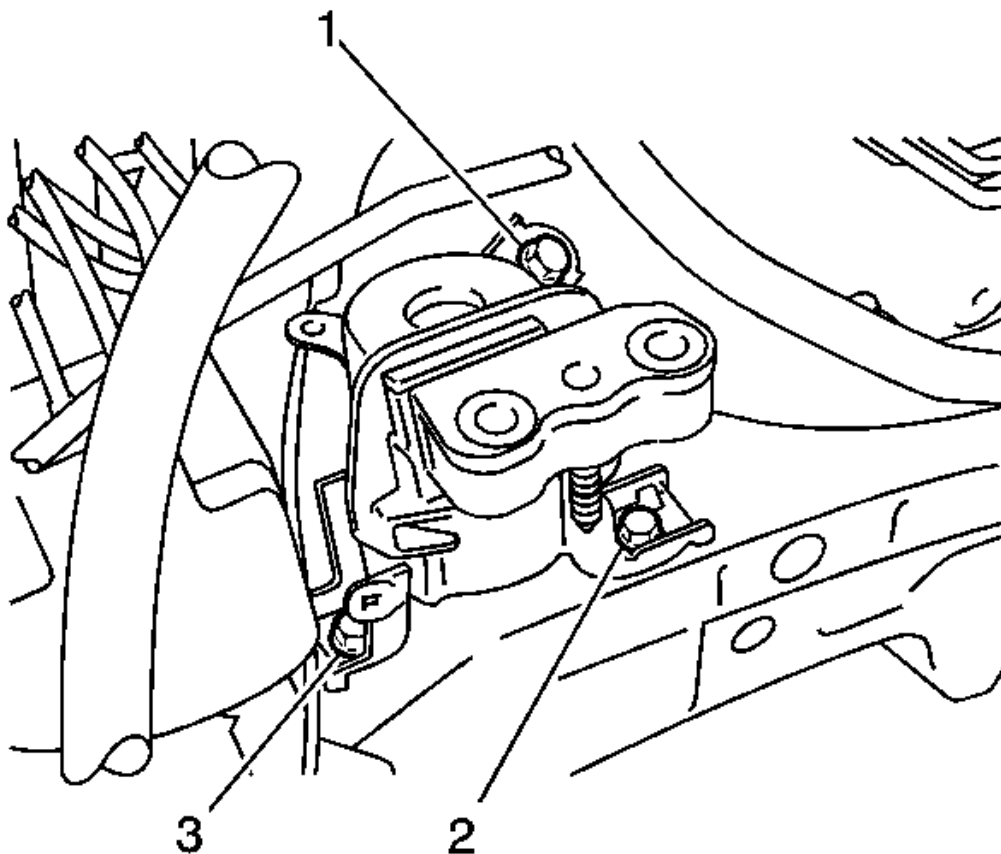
View Of Engine Mounting Insulator Bolts - Right Side
